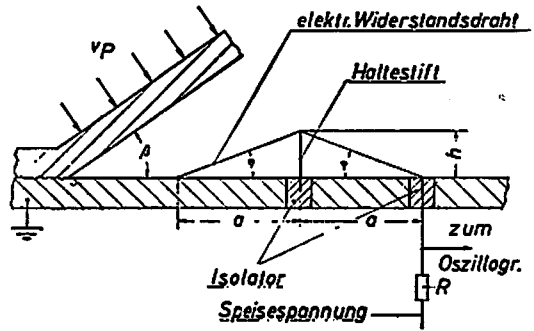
Roof-shaped resistant wire for measurement of explosive welding parameters
